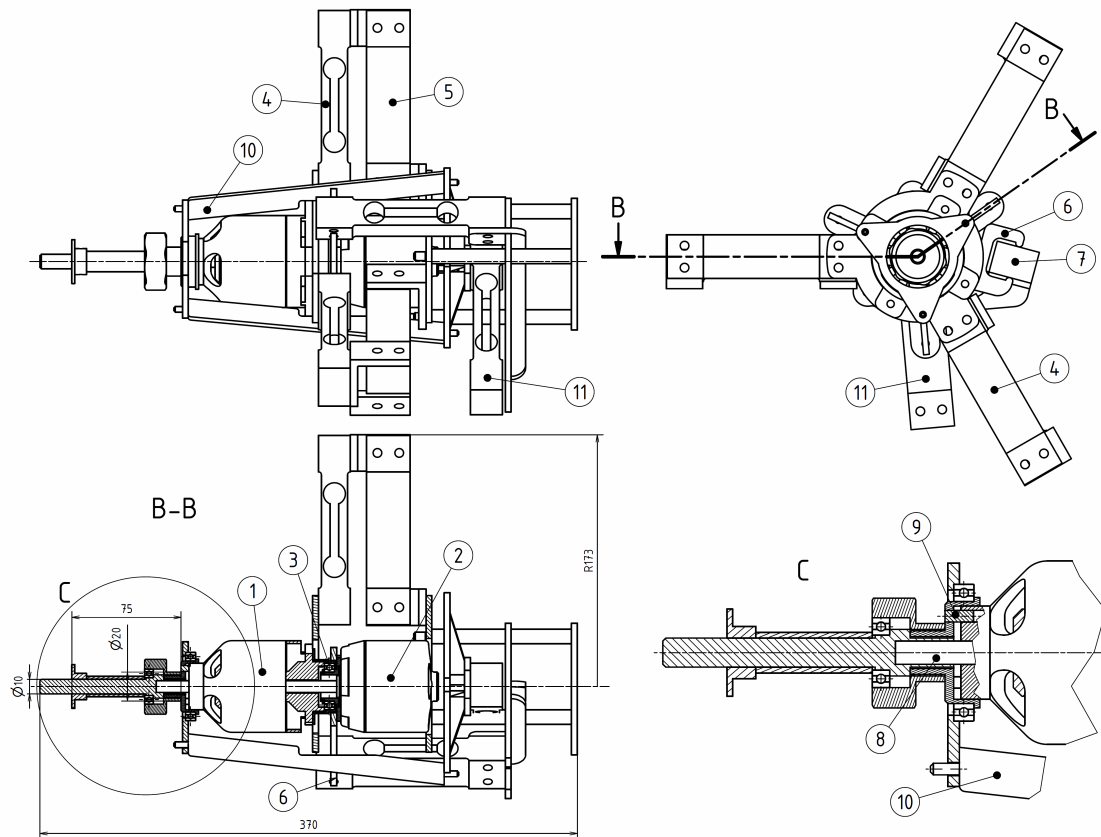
The coaxial motor power unit including force measuring motor mount, also appeared in [A 7]
